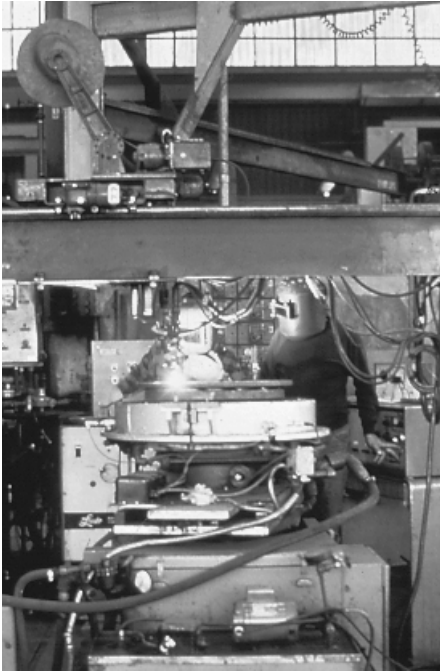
Slot welding a two-piece impeller. (*Dresser-Rand Company, Olean, N.Y.*)
